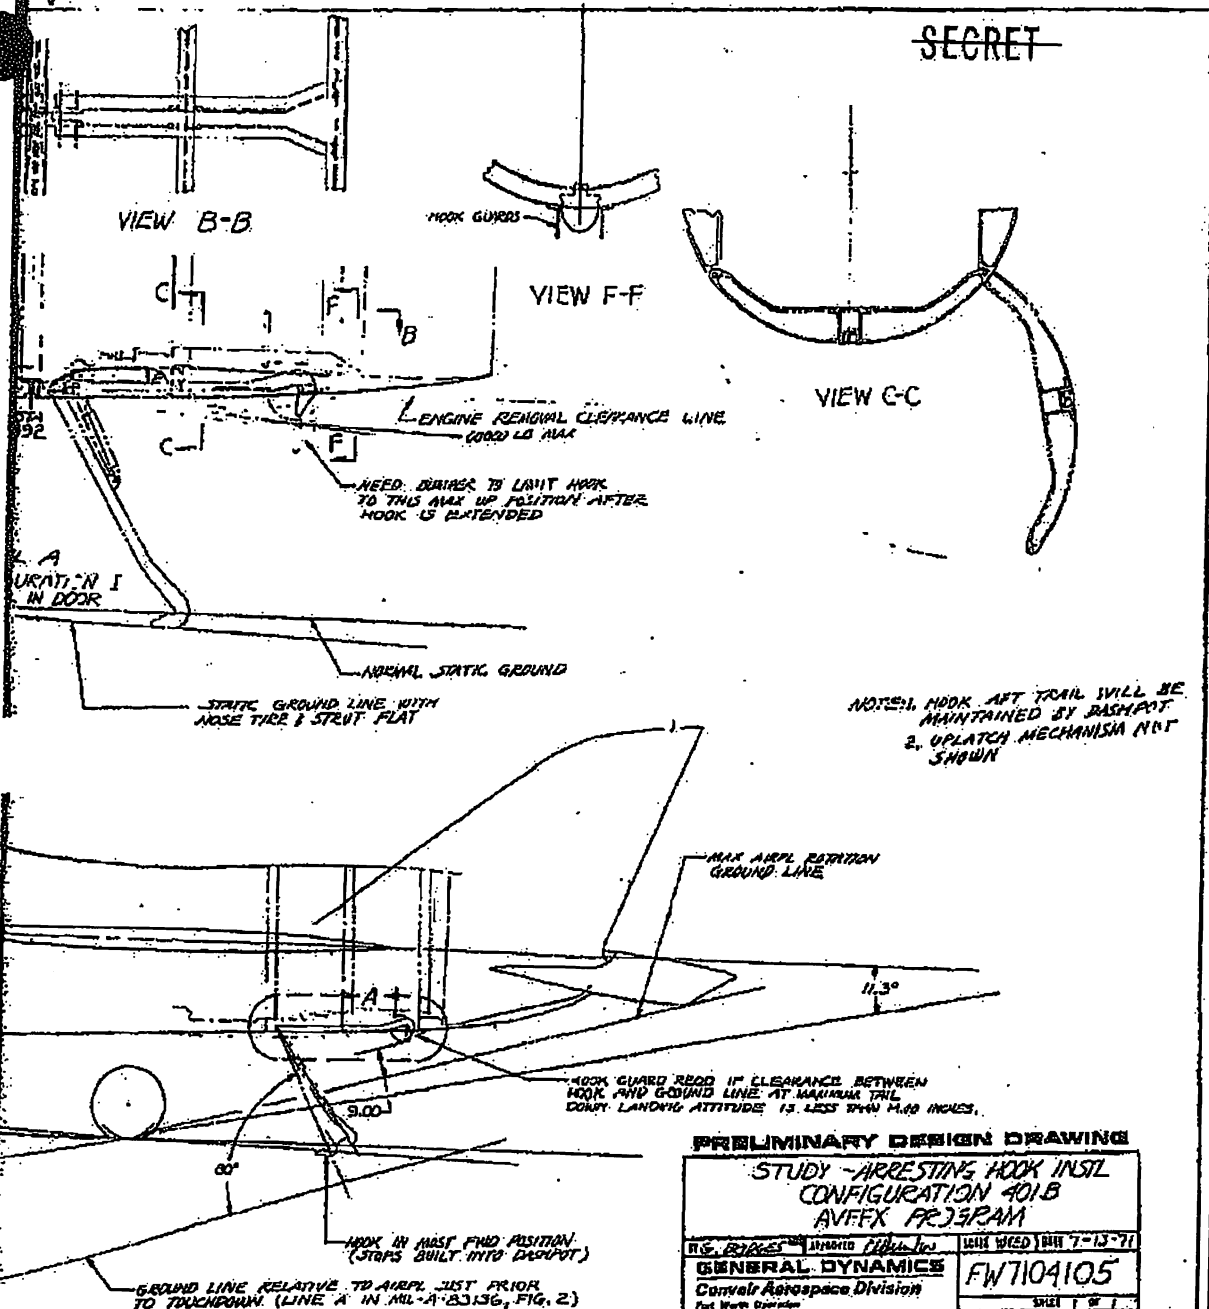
Arresting Hook Installation - Configuration 401B (U)
